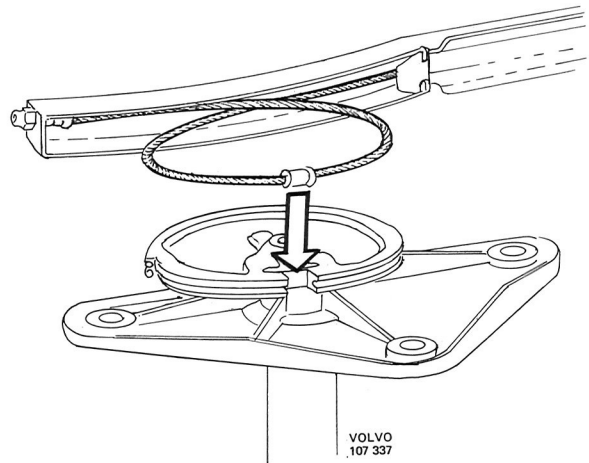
Installing cable for drive link and parallel drive link, left-hand side
